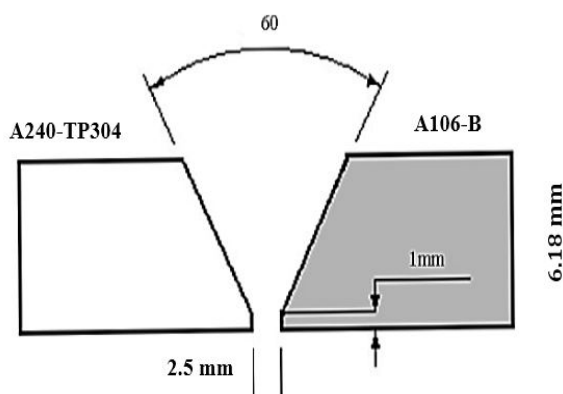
A schematic of the plates prepared for the welding in this experiment.
